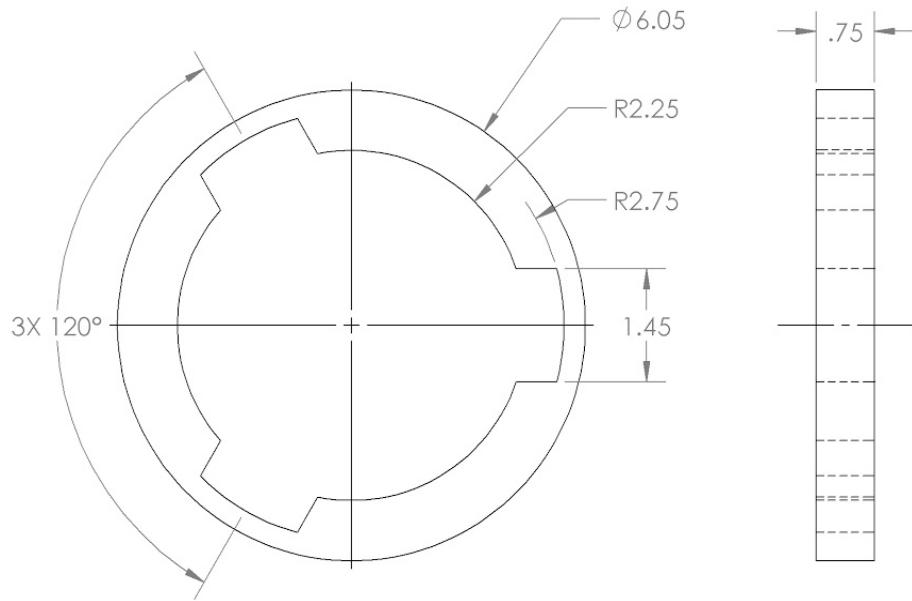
Locking Mechanism Top Outer Ring Drawing
